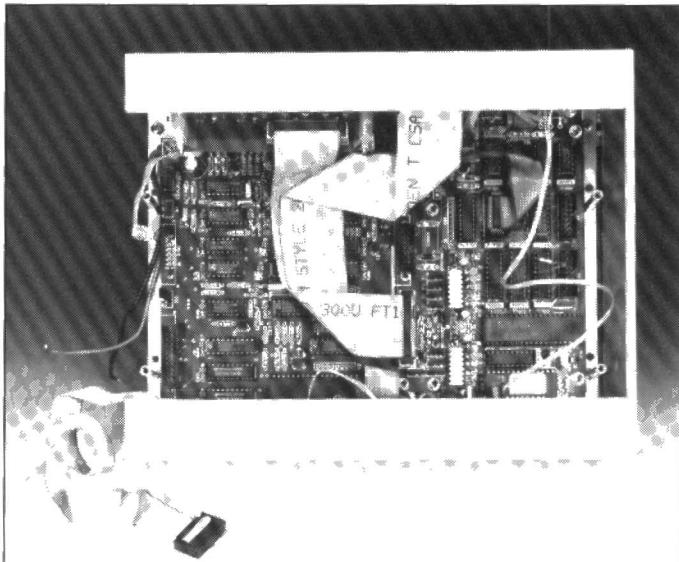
Be sure to make all connections underneath the board before mounting the Z80 card on PCB spacers.
